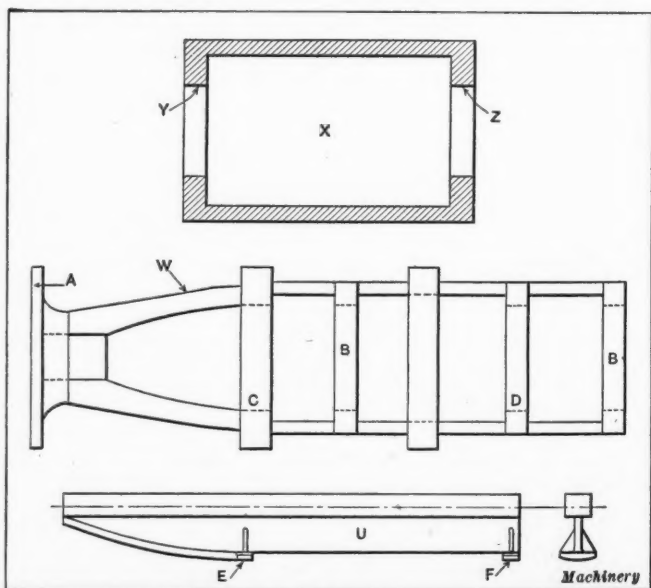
Test Pieces used in determining Accuracy of Actual Machining Operations
